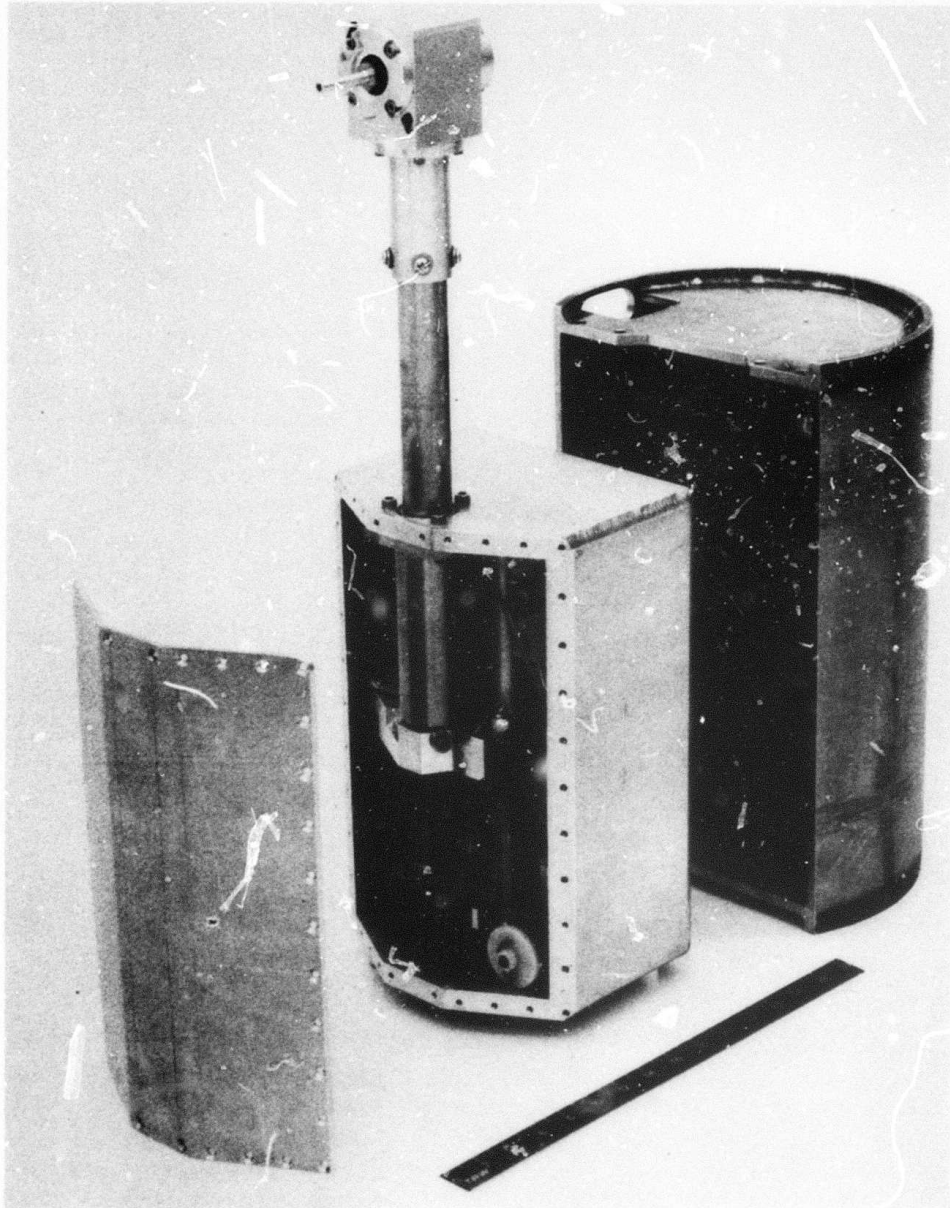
Photograph of the core drill module components. The right angle core drill head is pneumatically raised and lowered out of the core drill drive assembly. In turn, the core drill drive assembly is moved in and out of the support housing via a lead screw mechanism to provide the drilling motion.
